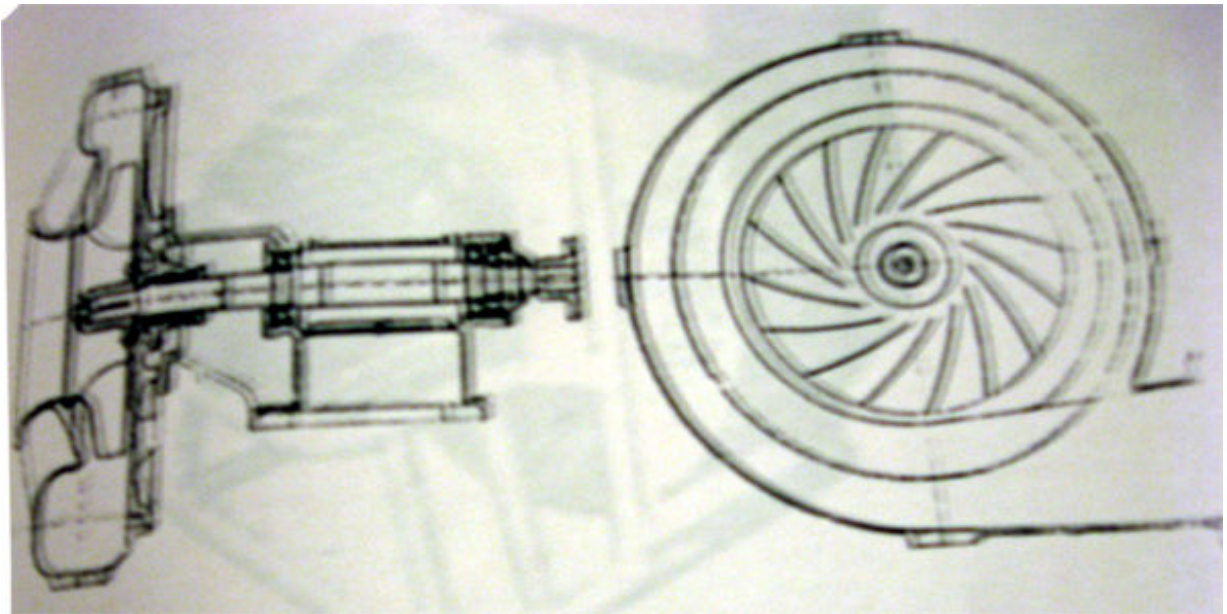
Medium-pressure fan manufactured by Sulzer
